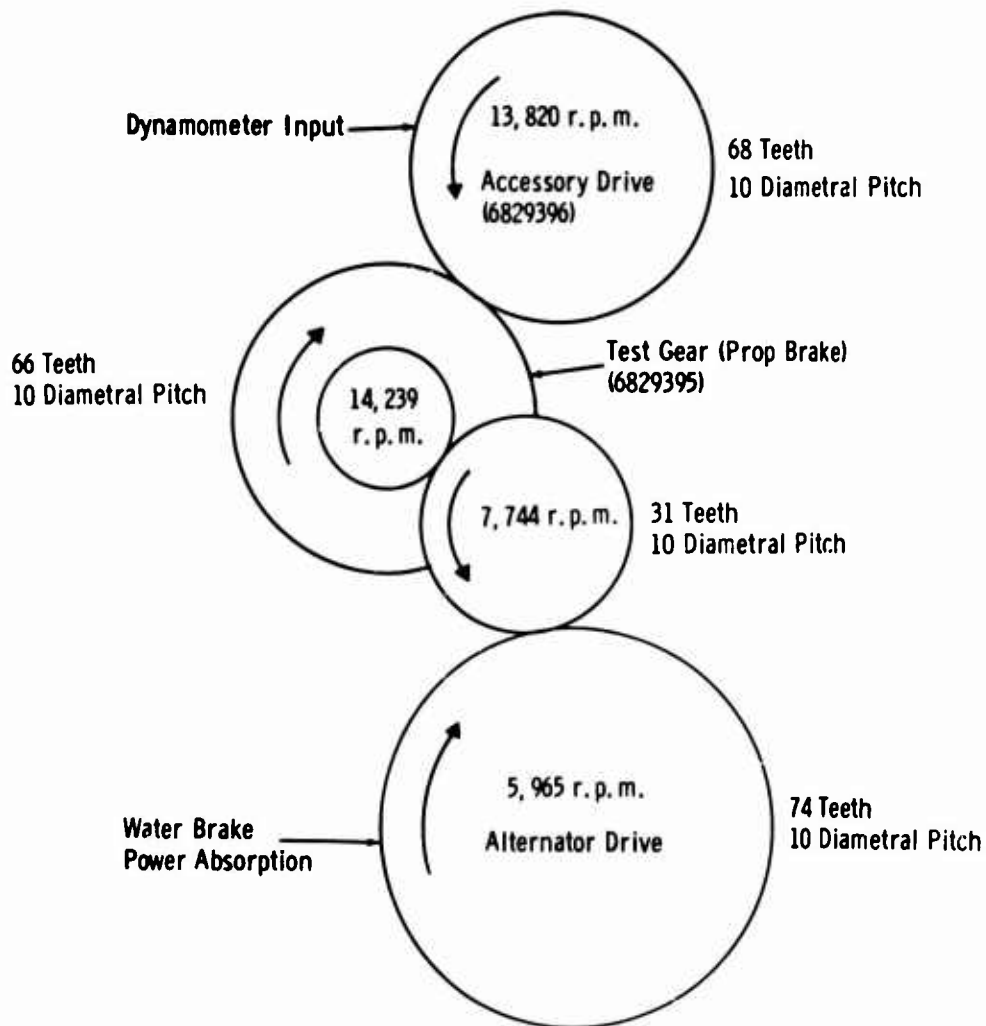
Schematic of T56 Propeller Brake Gear Train.
